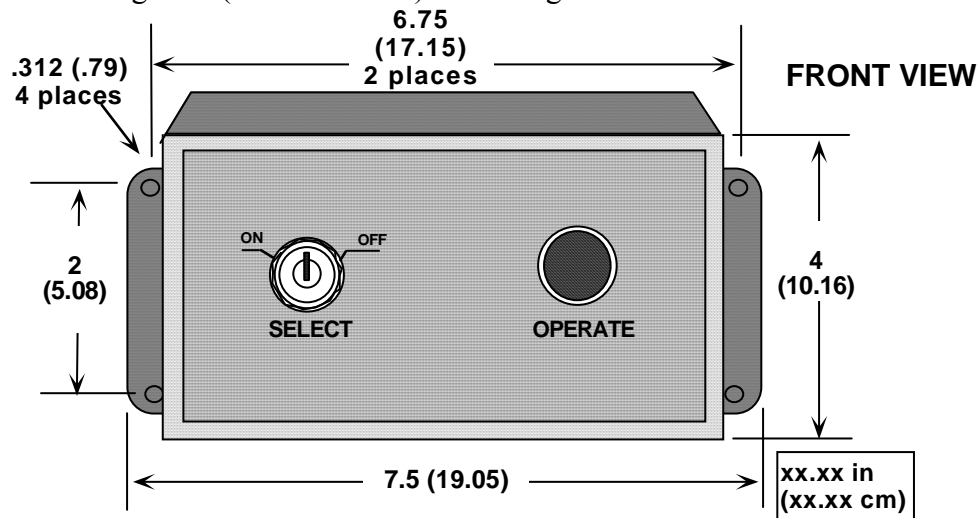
Bar Control enclosure mounting dimensions (front view)
